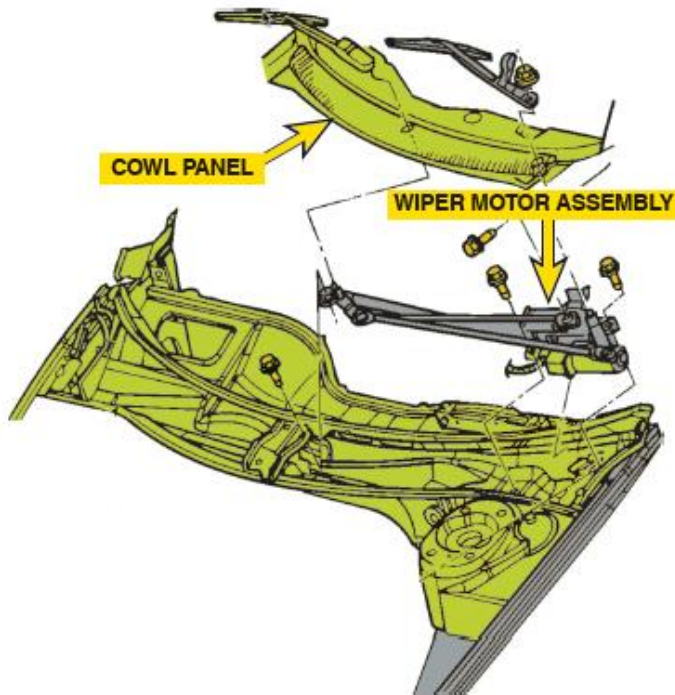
The wiper motor and linkage mount under the cowl panel on many vehicles.
